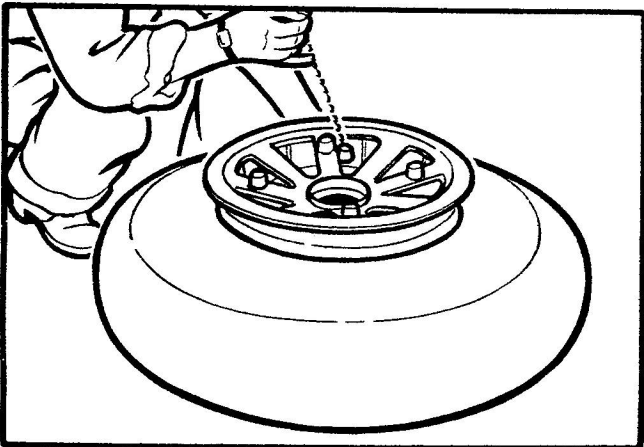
Holding Valve in Position with Valve Fishing Tool
